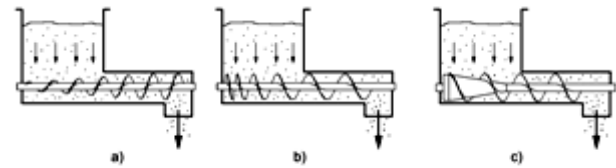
Schematic representation of the expected uniform material extraction from the hopper outlet by using variable geometry dosing screw feeders. a – extraction using a tapered diameter screw feeder; b – extraction using a variable pitch screw feeder; c - extraction using a tapered shaft screw feeder.
